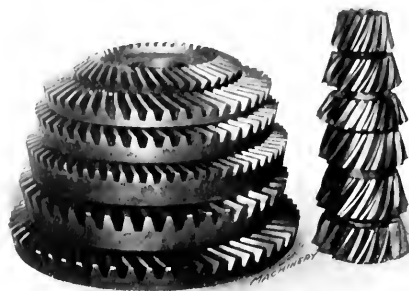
Spiral Bevel Gears cut on the Gleason Generator
